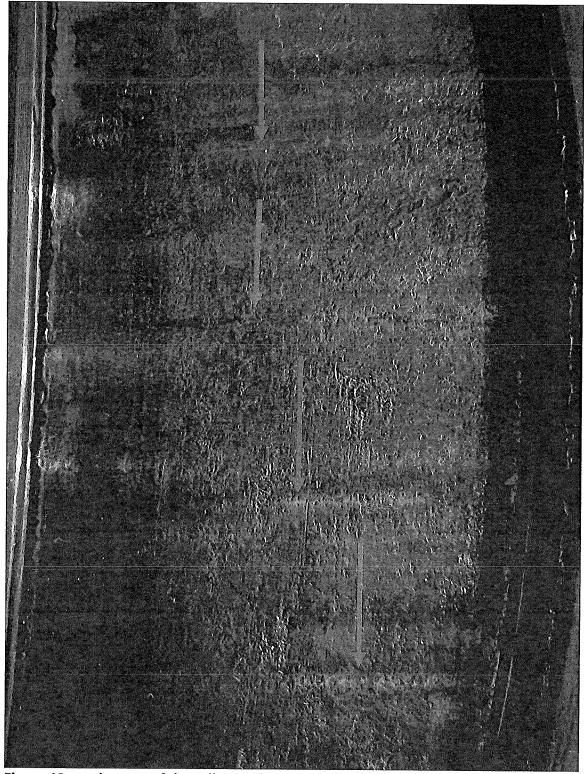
a close-up of the roller track surface. Spalling is very apparent. Spalling is due to metal-to-metal contact which indicates lubrication issues. The linear pattern which you see (arrows) is due to corrosion.
